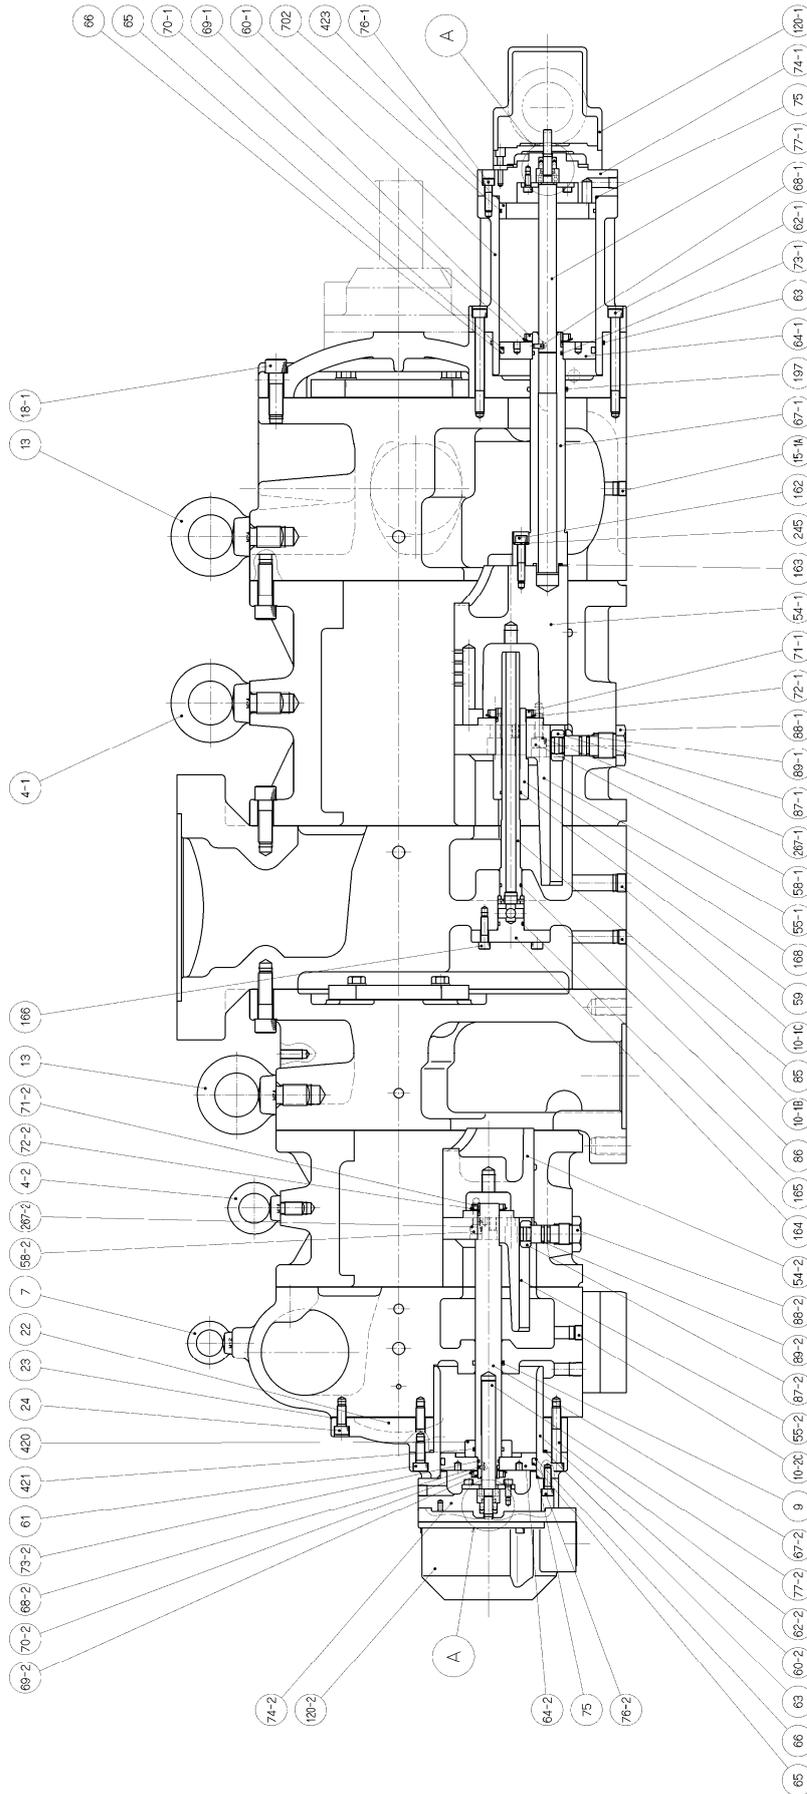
2016MSC Assembly Sectional View (Vertical)
